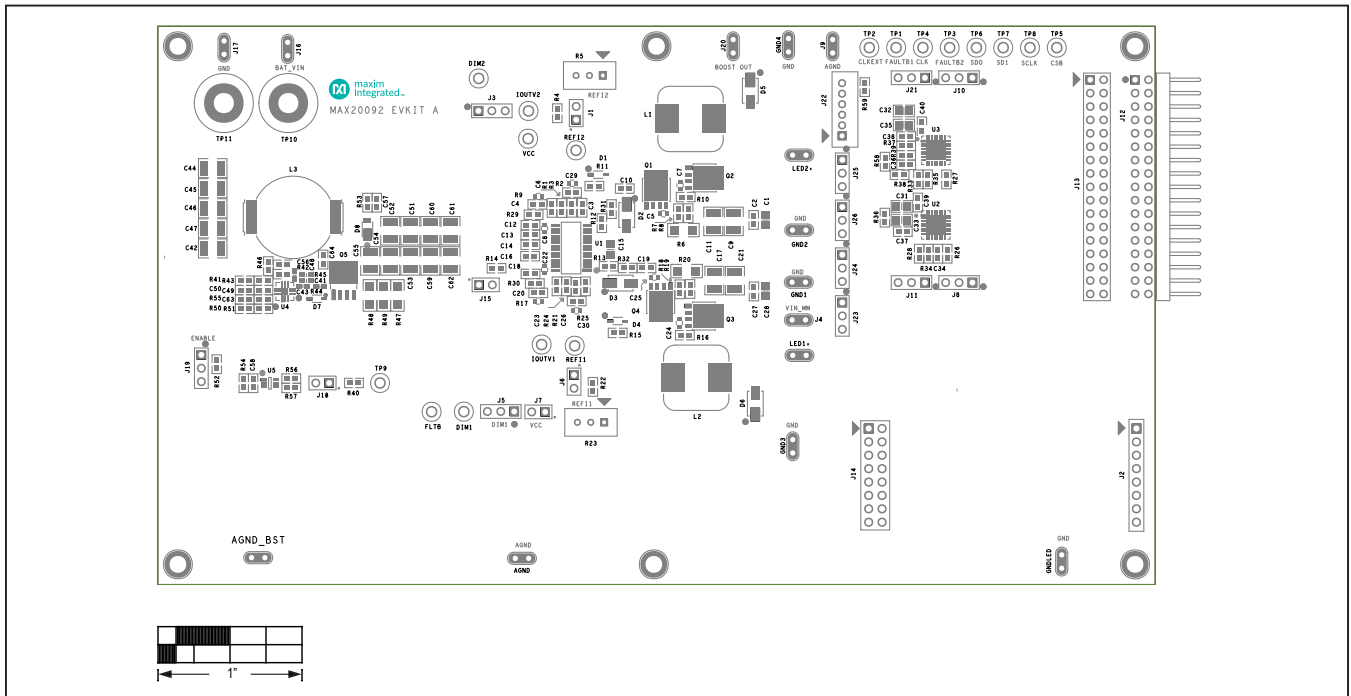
MAX20092 EV Kit Component PCB Layout—Component Side
